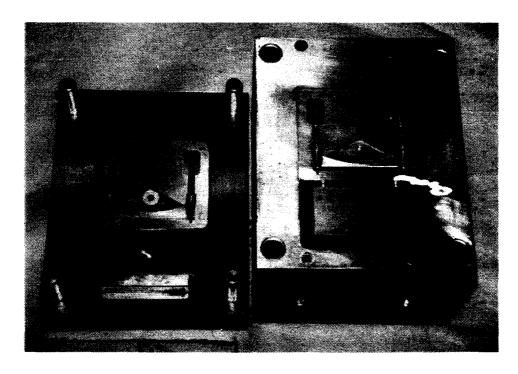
Top and bottom sections of TR-317 bracket injection mold
